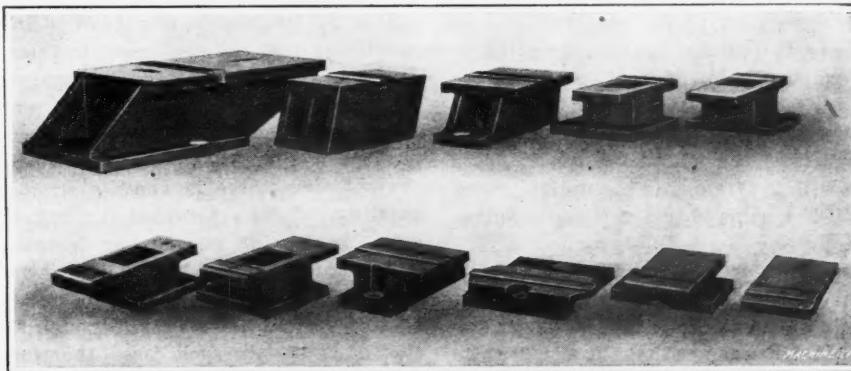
Adjustment Blocks used on Horizontal Boring Machine
